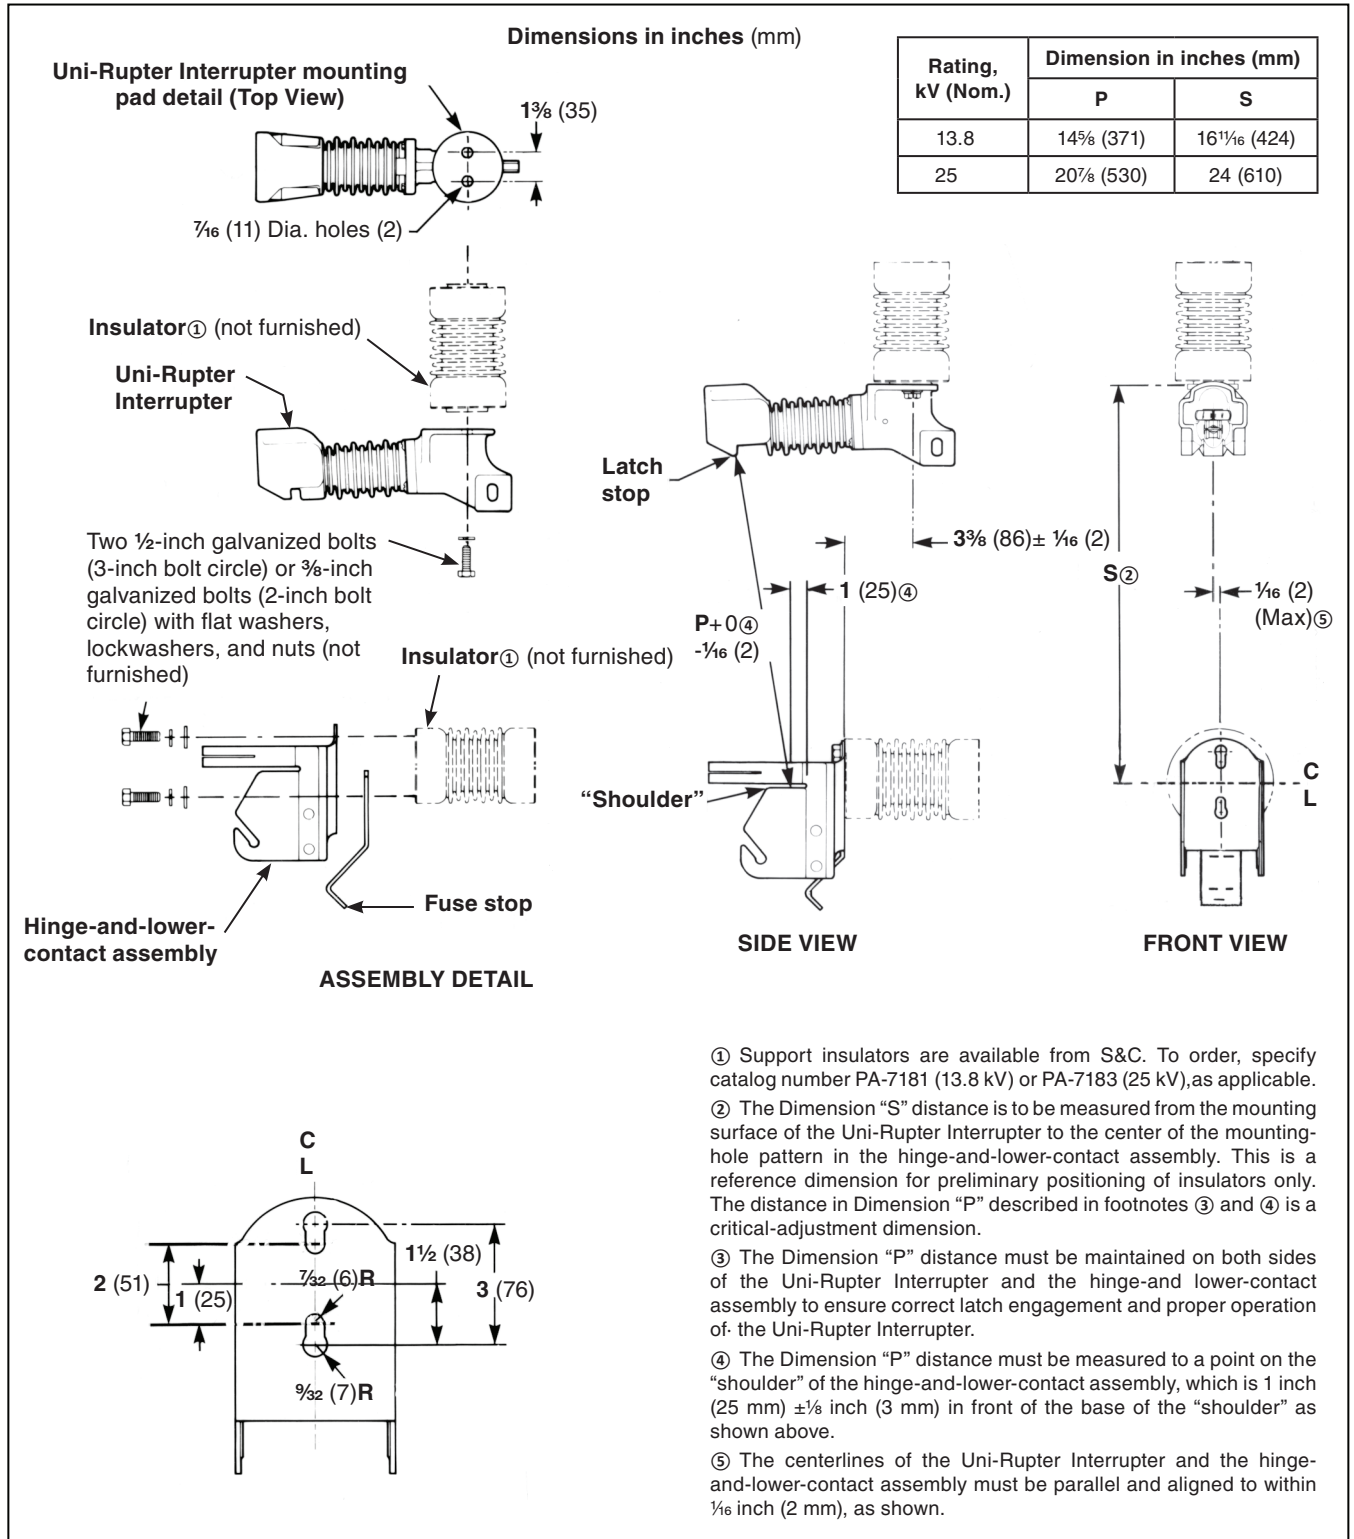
Mounting configuration using the back-supported hinge-and-lower-contact assembly.
